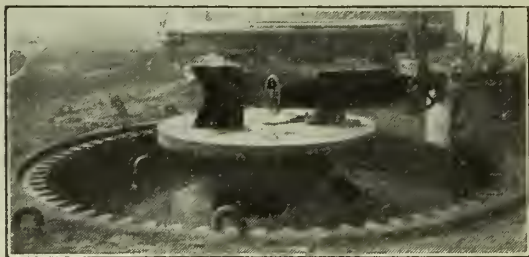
MOULDING A DOUBLE HELICAL SPUR WHEEL.
